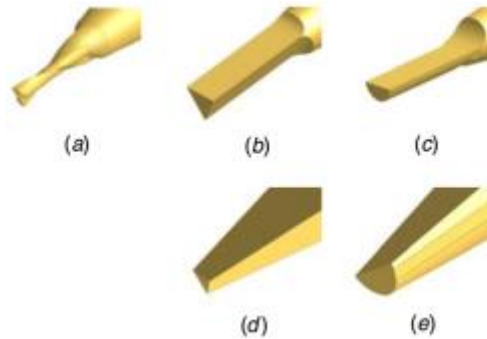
(a) Two-flute end mills, (b) Triangle type end mills with a straight body, (c) D-type end mills with a straight body, (d) triangle type end mills with a tapered body, and (e) D-type end mills with a tapered body
